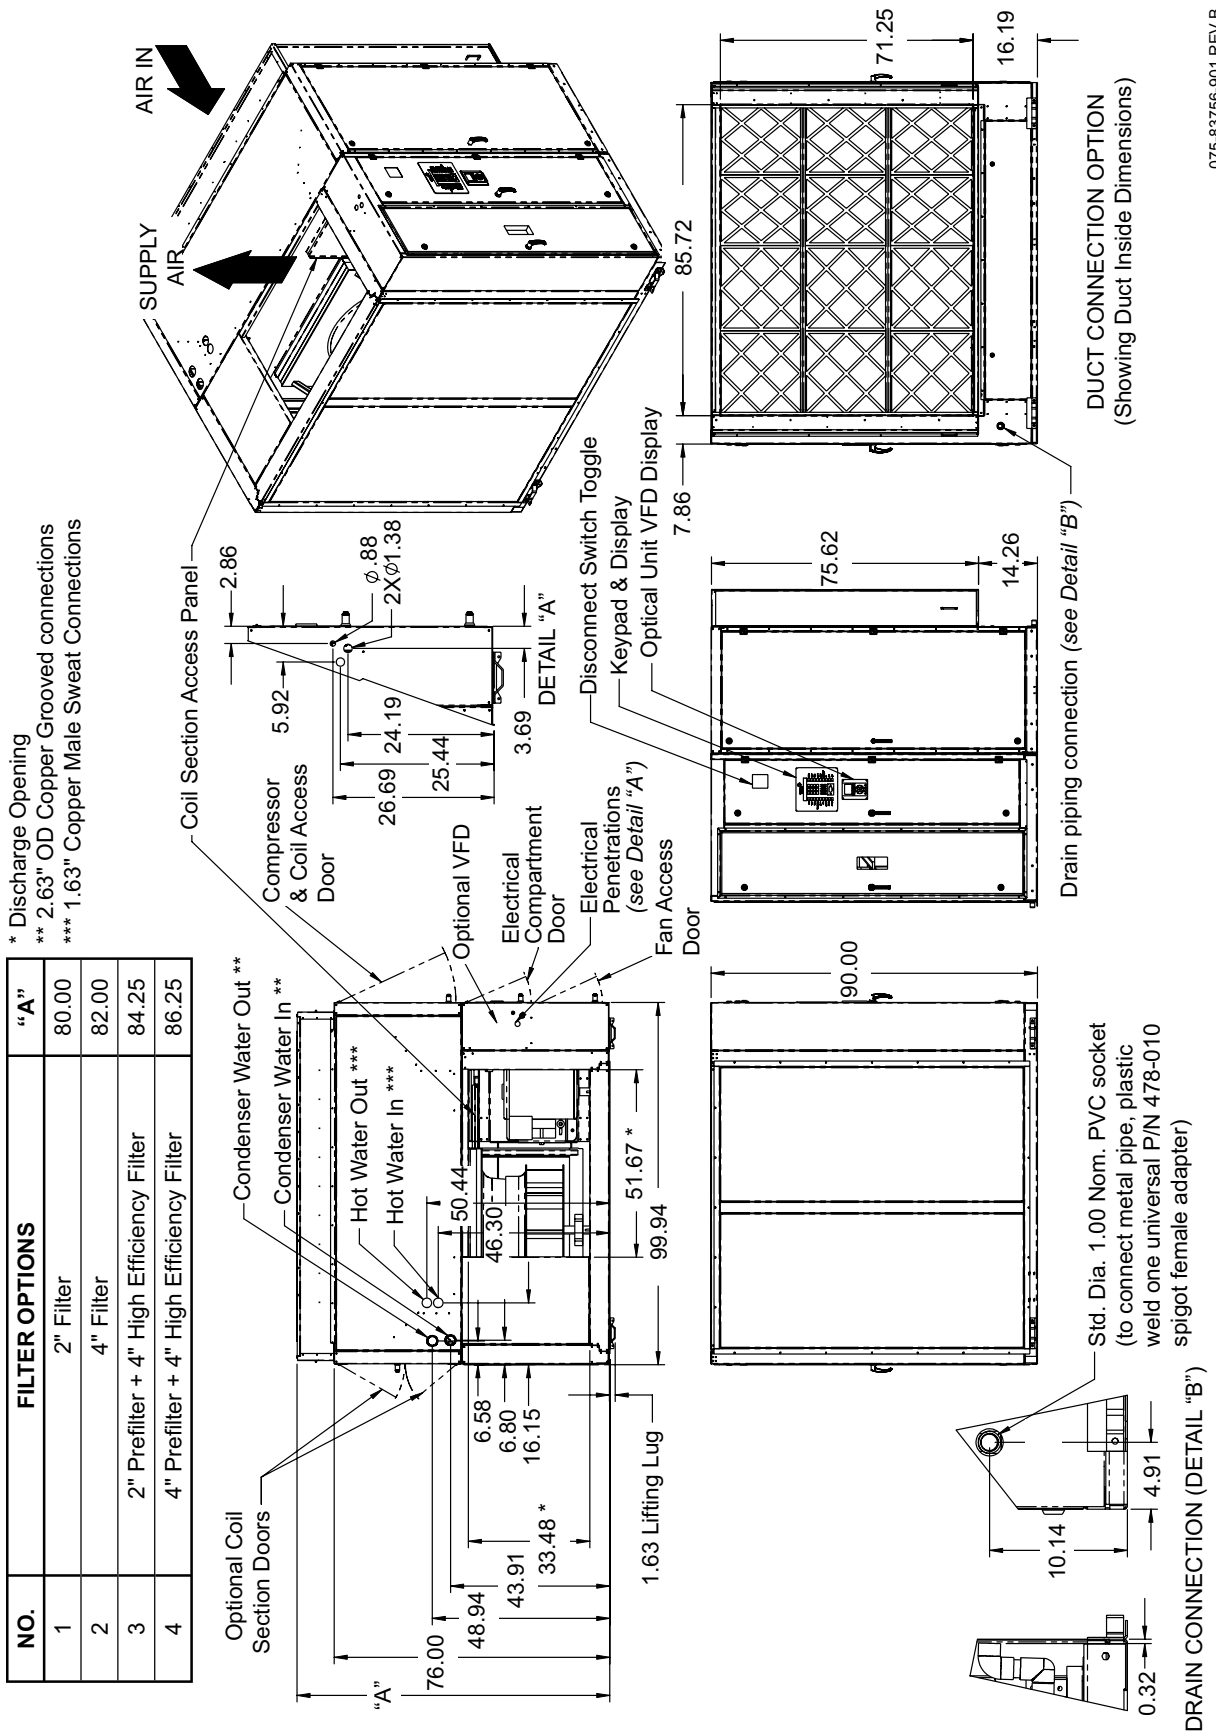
UNIT DIMENSIONS, TOP DISCHARGE (LSWU025–LSWU040)
